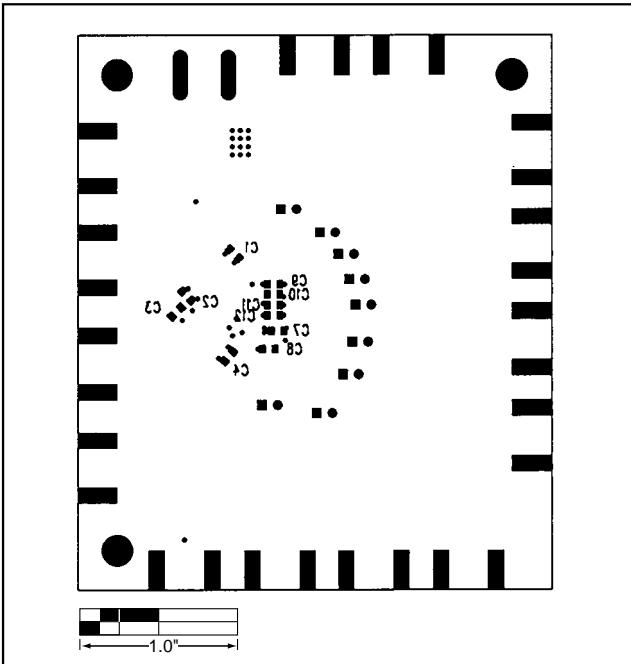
MAX3680 EV Kit PC Board Layout—Bottom Silkscreen
